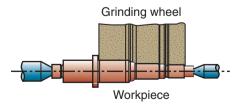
Plunge grinding of a workpiece on a cylindrical grinder with the wheel dressed to a stepped shape.
